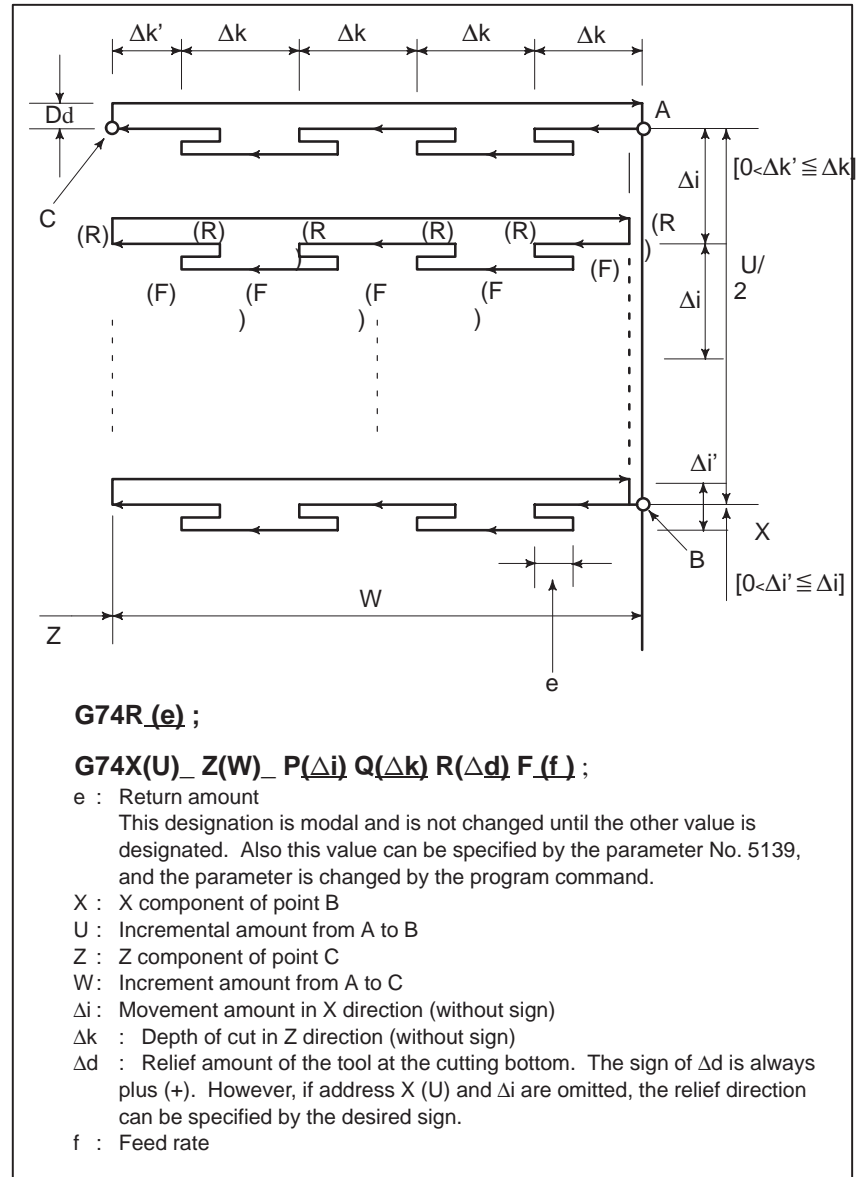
(a) Cutting Path in End Face Peck Drilling Cycle
